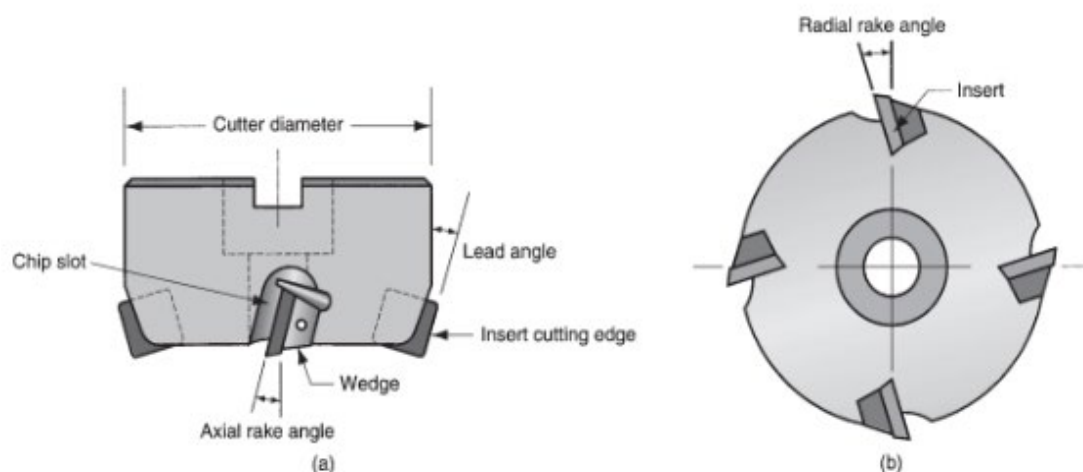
Schematic of a four-tooth face milling cutter illustrating the insert geometry and the associated cutting edge angles: (a) side view and (b) bottom view [125].
